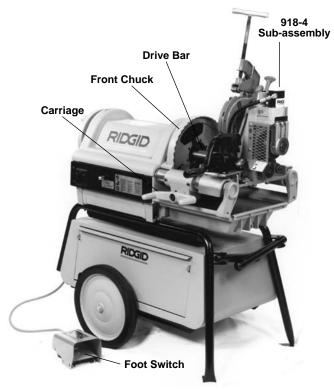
918-4 Roll Groover on 1224 Threading Machine
